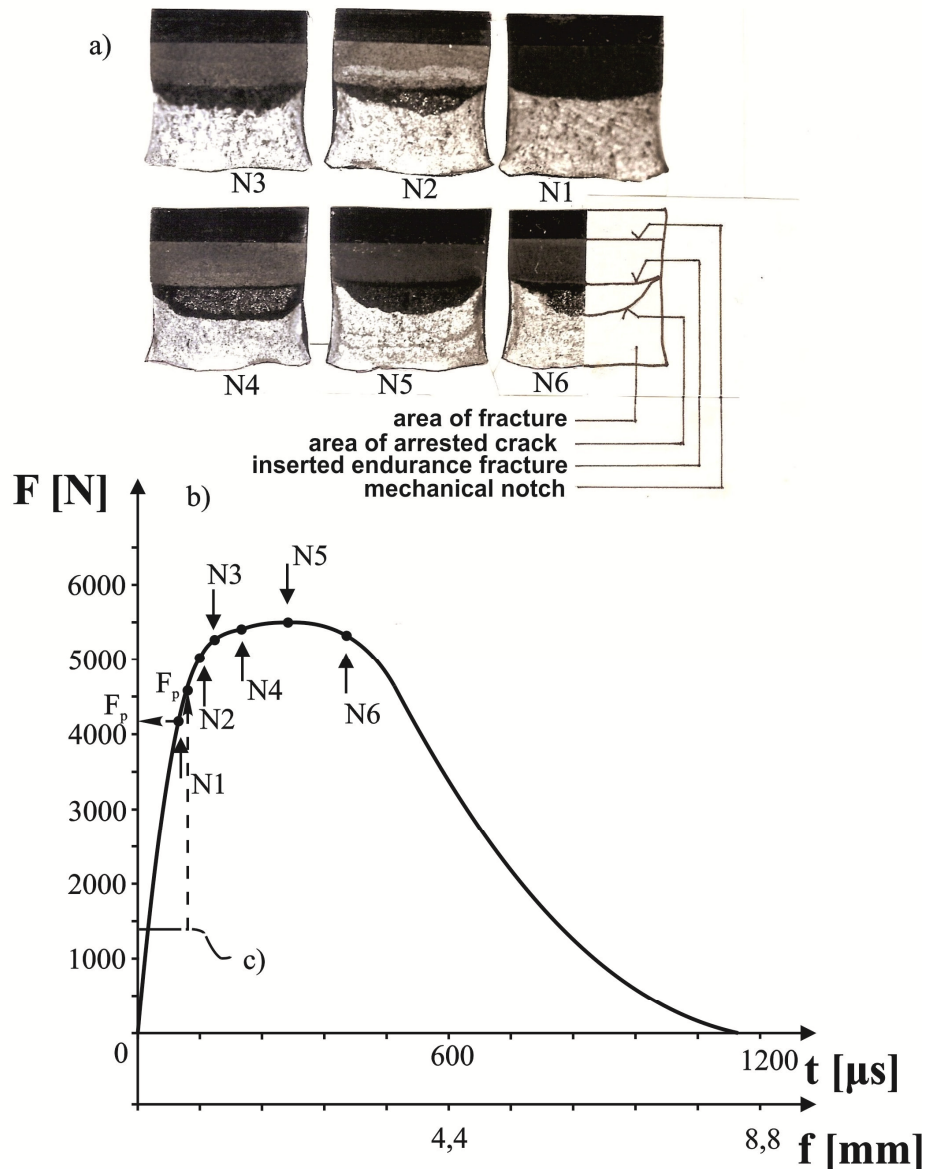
Photographies of sample fracture surfaces after dynamic load with different crack increases, obtained by the multi-sample method of tested steel 18G2A (a), points referring to particular crack increases for these samples, inserted on the diagram of dynamic destruction of this steel (b), recorded sign after peeling tensometric sensor out, determining force F_p in strain gauge test (c)
